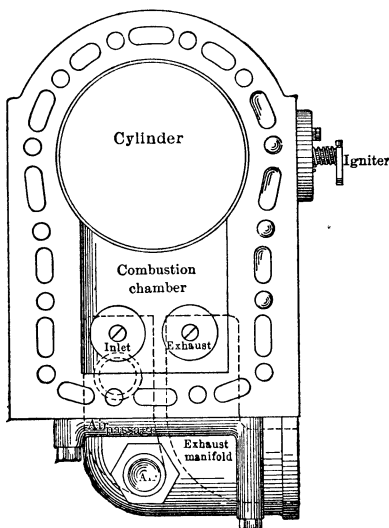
Top view of cylinder with head removed, Nash engine.
